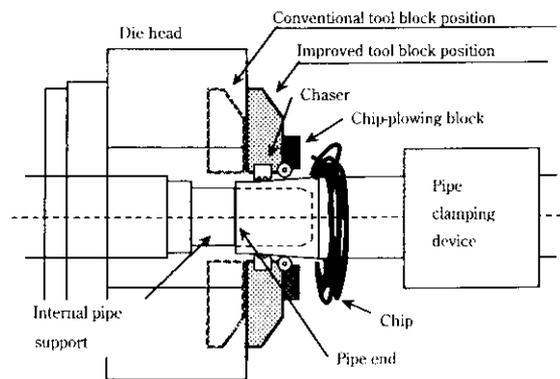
Cross sectional view of threading part with pipe-rotating type threading machine
